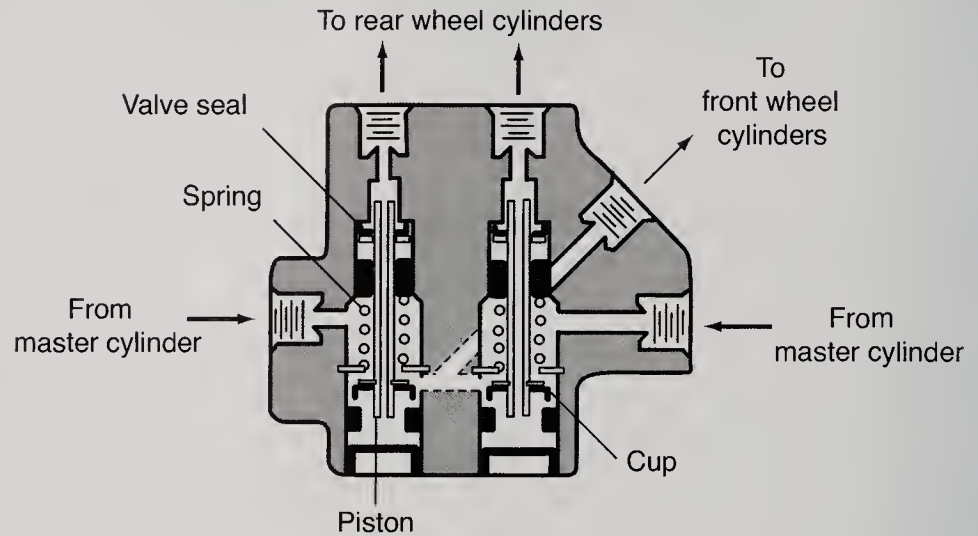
These dual proportioning valves are in a separate valve body mounted away from the master cylinder.
